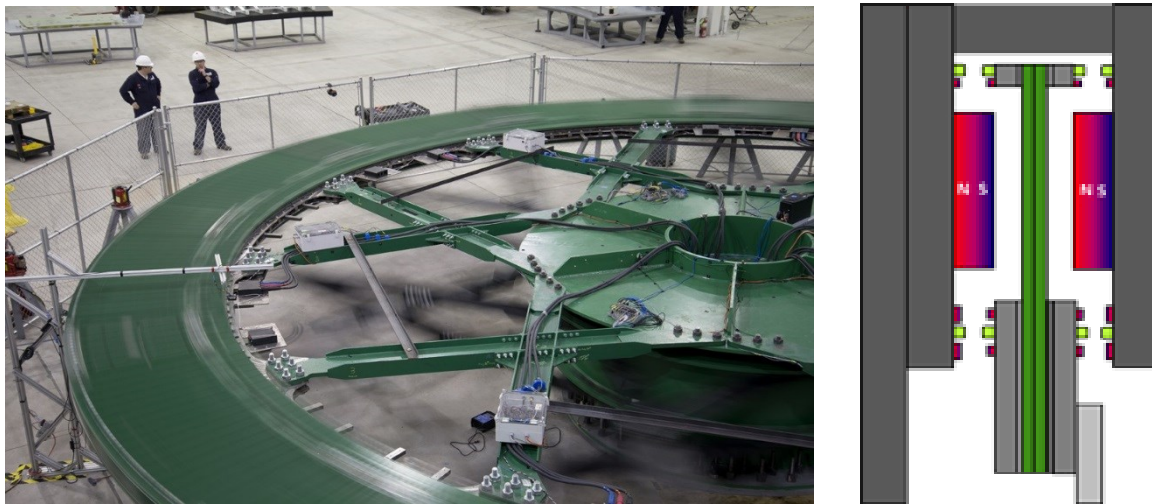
Boulder Wind Power's air cored generator assembly. Left image shows an isometric view of their 3 MW device, while the right image shows a cross-sectional CAD drawing [75]
